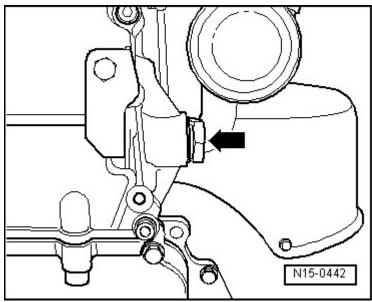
Identifying Cylinder Head Cover Bolts Courtesy of AUDI OF AMERICA, LLC
